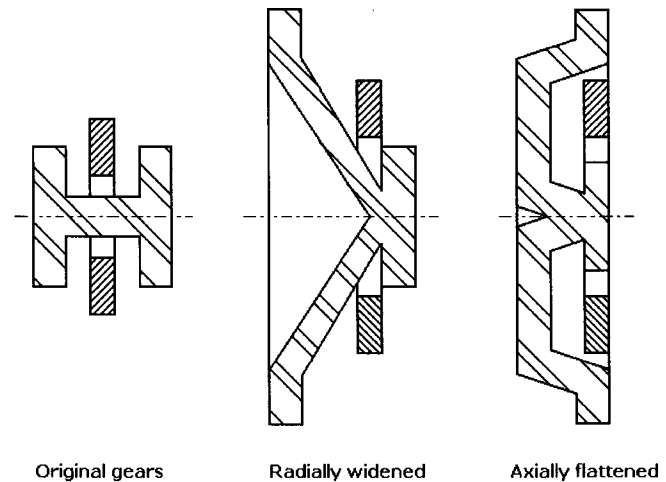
Evolutionary stages in converting conventional gears to axially flattened gears.
